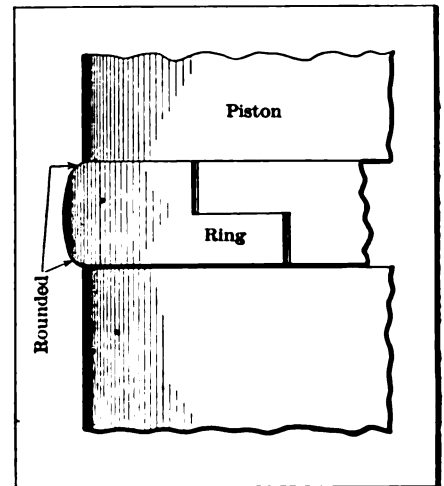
Showing rounded corners of the piston rings due to the rigidity of design and wide ports
